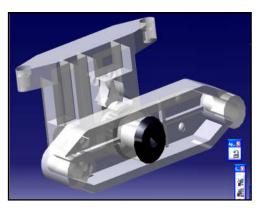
Modified Belt Shifter Design using CATIA V5R20
